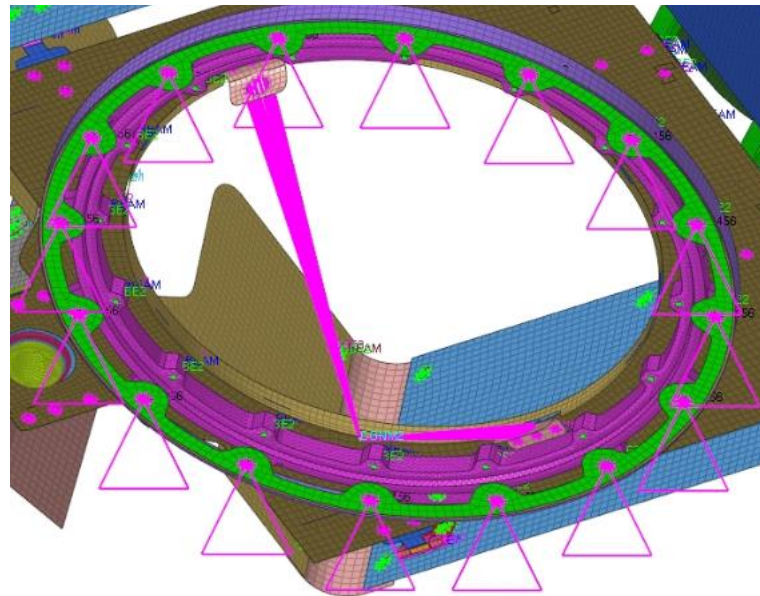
Constraints given to the turret assembly while performing modal analysis
